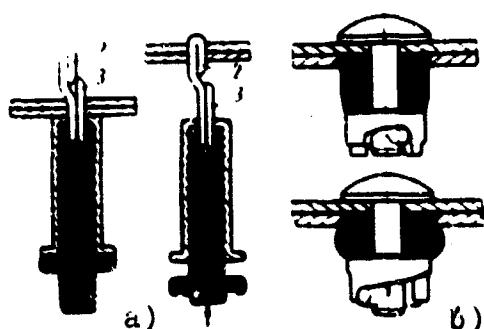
Joining of parts with device: a) silentblock; b) silentblock-vibrex.
